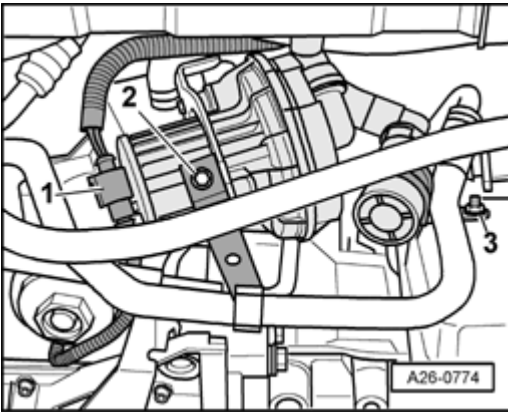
Disconnecting Electrical Connector At Secondary Air Injection (AIR) Pump Motor -V101-
